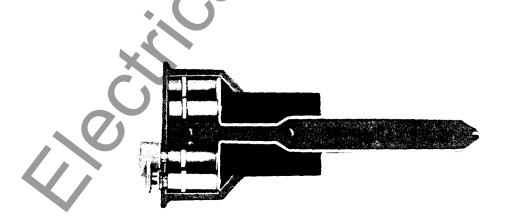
(8043327) Sectional View of 12XCA11A1 Dual Test Probe and Shorting Plug
